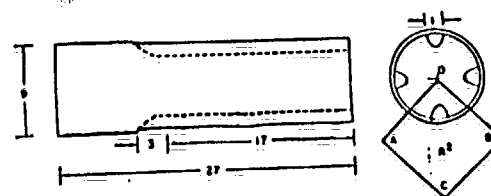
Engineering Layout of Multiple Jet Geometry, a) Plan-View, b) End View, Dimensions in mm.
